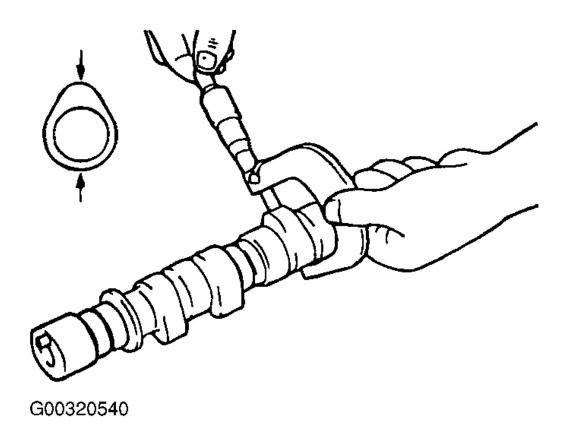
Measuring Camshaft Wear Courtesy of KIA MOTORS AMERICA, INC.
